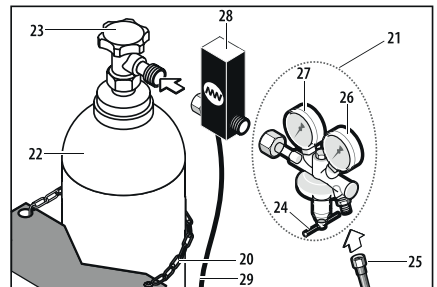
Connections Gas Cylinder - Heater - Pressure Regulator
